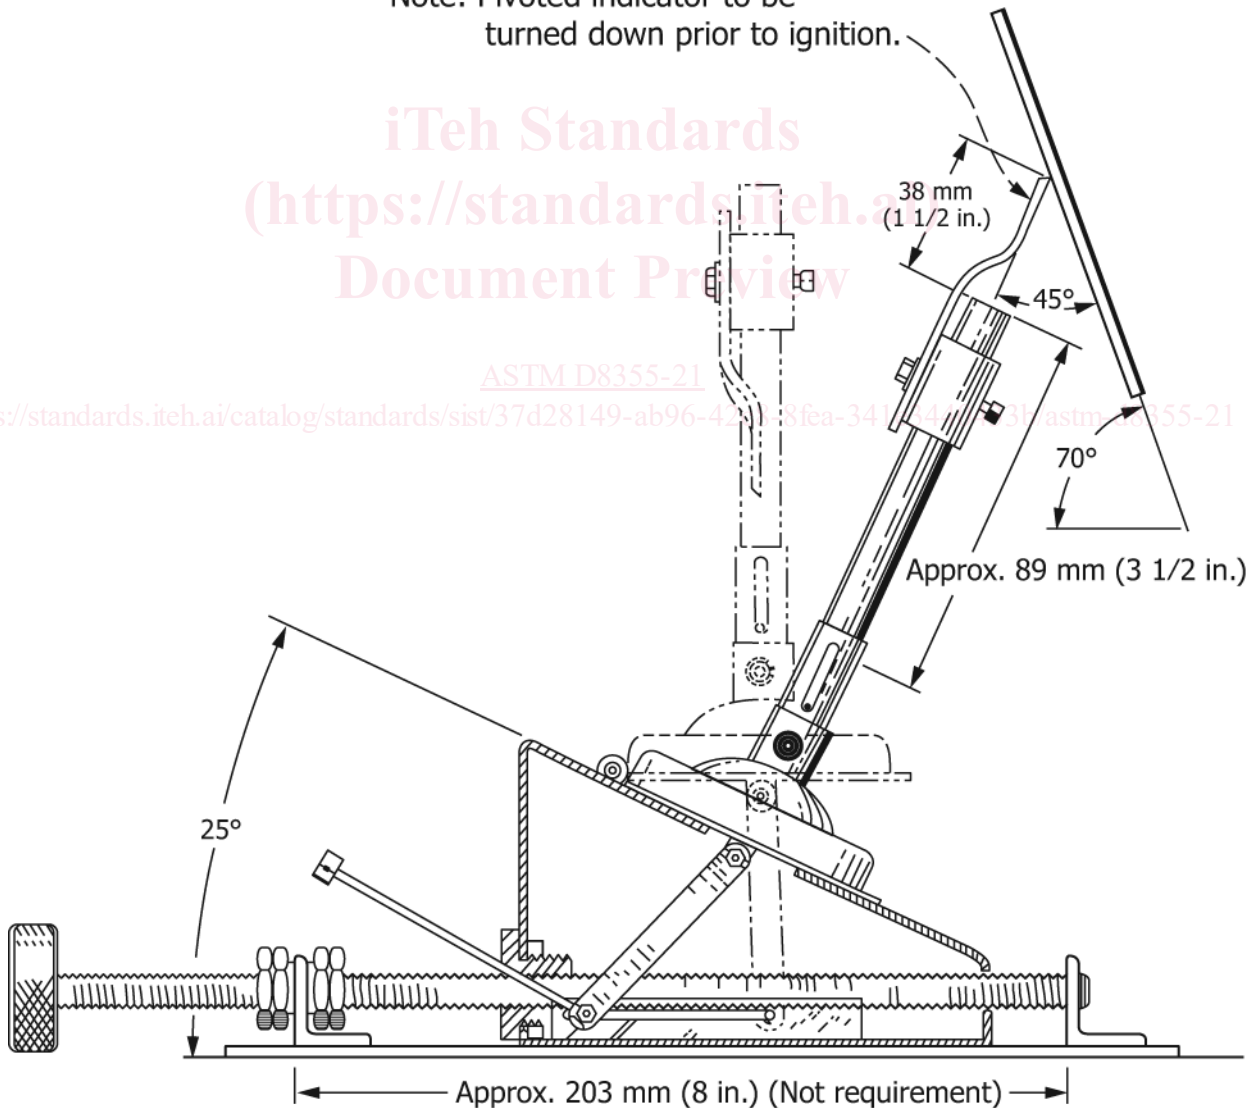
Positioning Mechanism for Burner (Test Method A)
